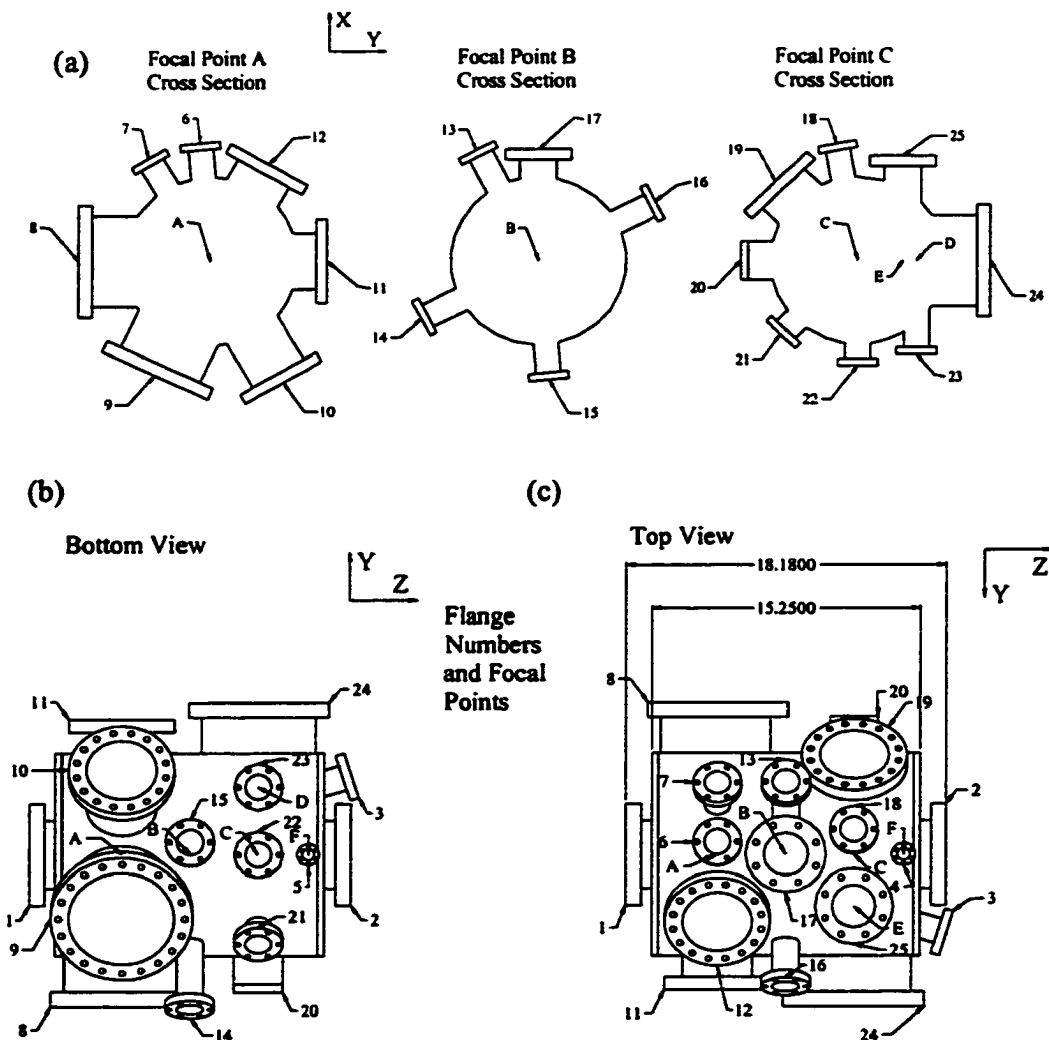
Design drawings of selected views of the UHV STM vacuum chamber. (a) Cross sectional views of the three main levels in the vacuum chamber. (b) Bottom view detailing flange numbers and focal point positions. (c) Top view detailing overall length, flange numbers and focal point positions.
